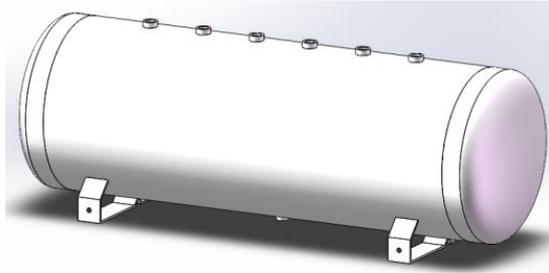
air compressor horizontal air storage tank three-dimensional model
